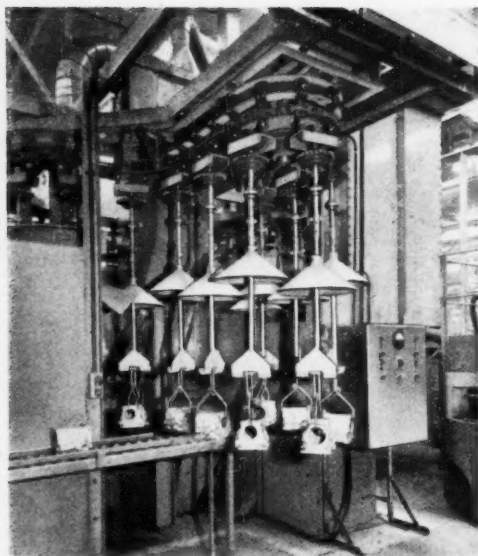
The First Machining Operation on the Gearbox Casting is Preceded by Shot-blasting in this Automatic Conveyorized Plant
